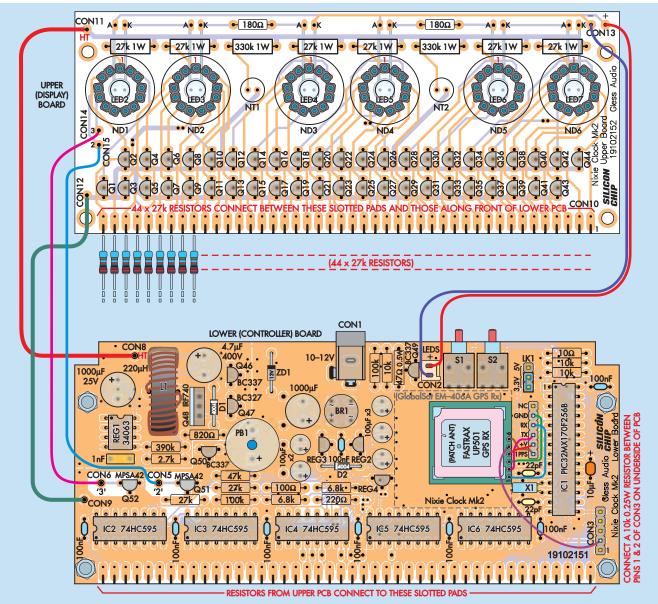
follow this PCB layout and wiring diagram to build the Nixie Clock. The sockets on the upper board are made from snapped sections of socket strip – note how they are arranged. The GPS module connections shown are for the Fastrax UP501; other modules will require different connections so refer to Fig.5 or the appropriate data sheet and observe the connector pin labelling. Once the two boards are joined by four spacers, the six wires between them can be connected and the $44 \times 27 \mathrm{k}\Omega$ resistors soldered into the slots along the front. Don't forget to add the $10\mathrm{k}\Omega$ 0.25W resistor between pins 1 and 2 of CON3 on the underside of the PCB.
